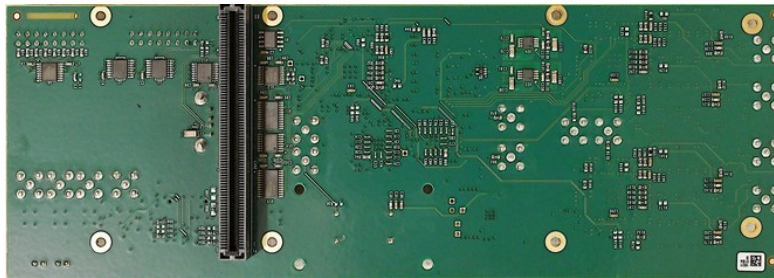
Bottom face of the Triple DDS Radar Controller board.
